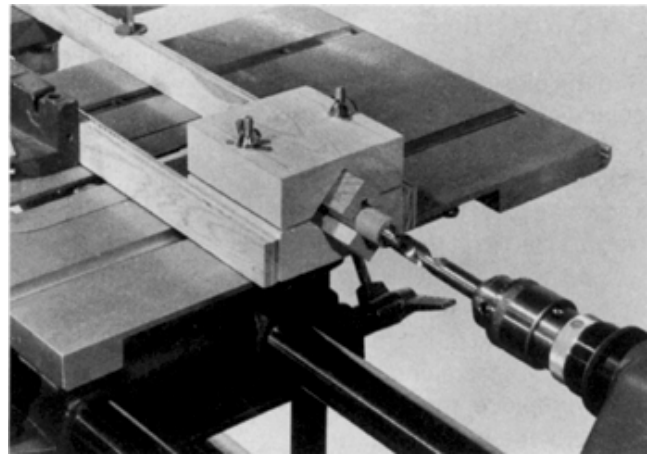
The extension V-block can also be used to grip short workpieces. Auxiliary V's are used when the stock's diameter is too small to be gripped by the basic V-block.
